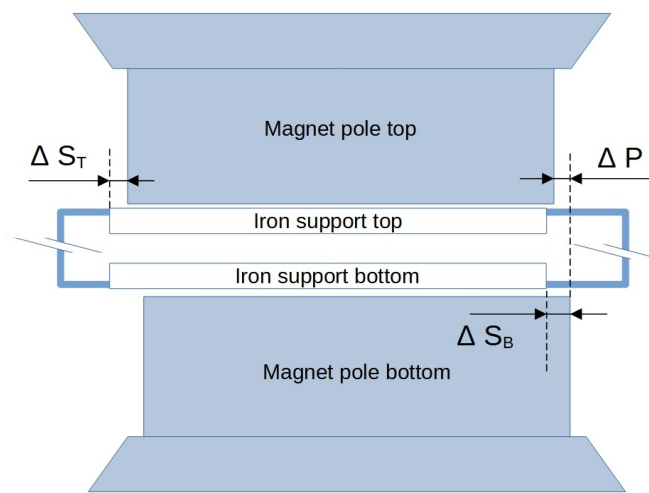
Schematic sketch of the magnet poles assembly. Dimensions are not to actual scale. See text for further details.
